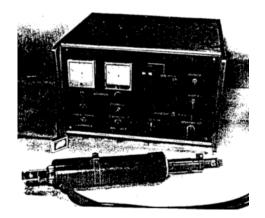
First UIT tool developed by E.O. Paton Welding Institute (Ukraine)
